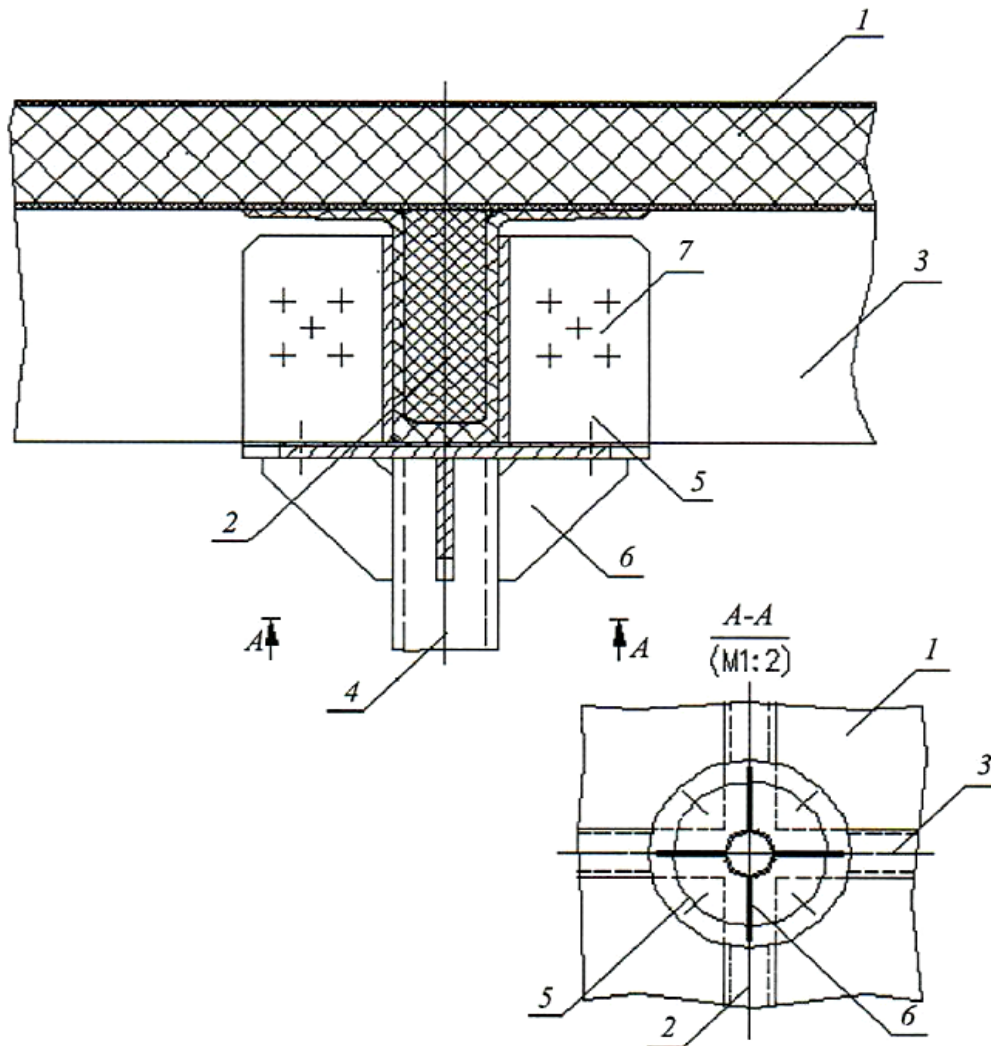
Attachment of the upper end of an aluminum alloy pillar at the intersection of the superstructure beam and deck girder:
